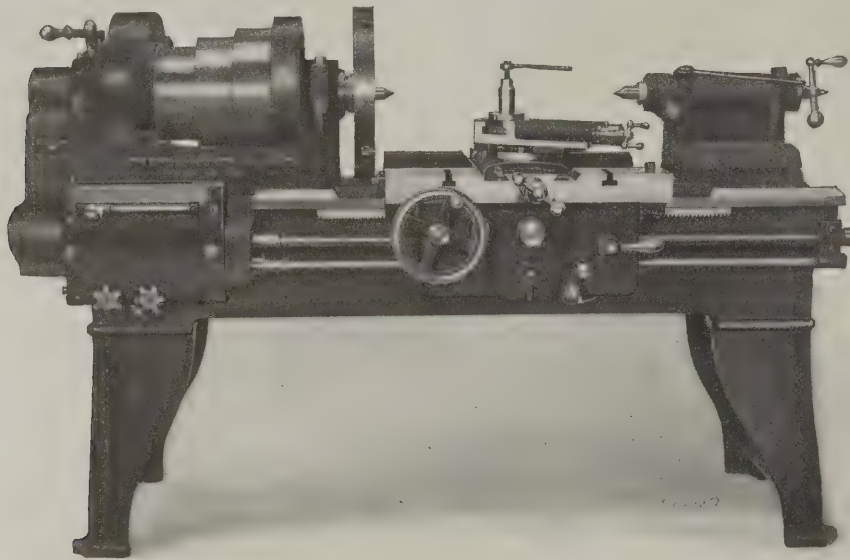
The Mueller 18-inch Heavy-duty Engine Lathe
